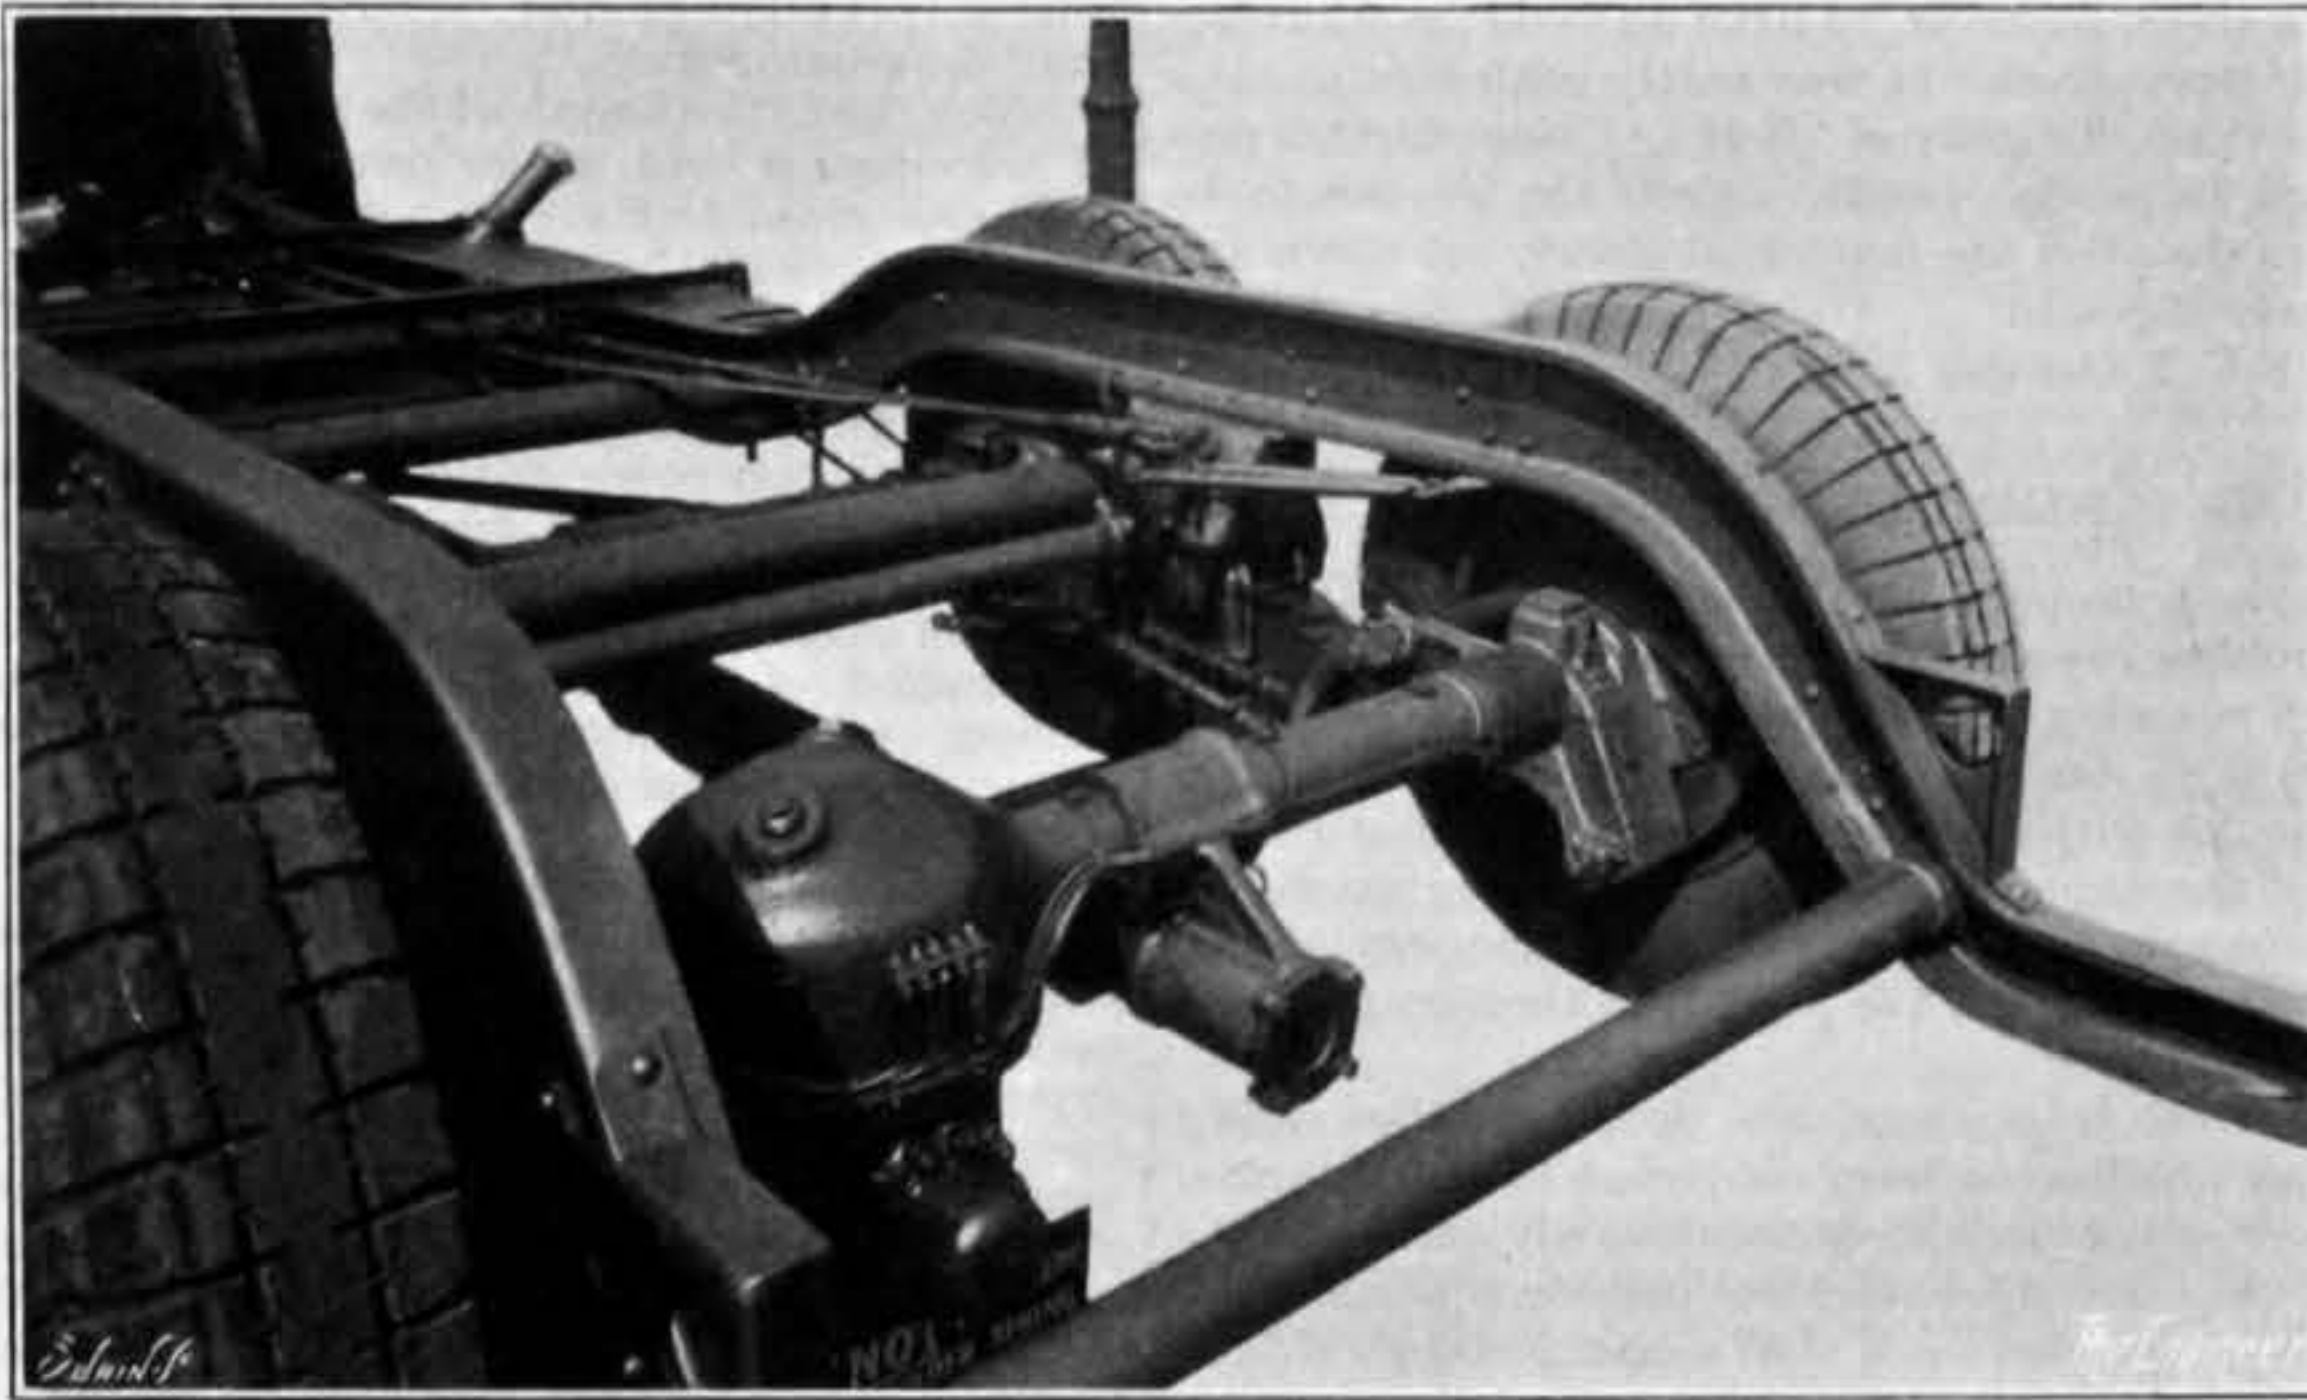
SIX-WHEEL CHASSIS REAR AXLES—A.E.C.
